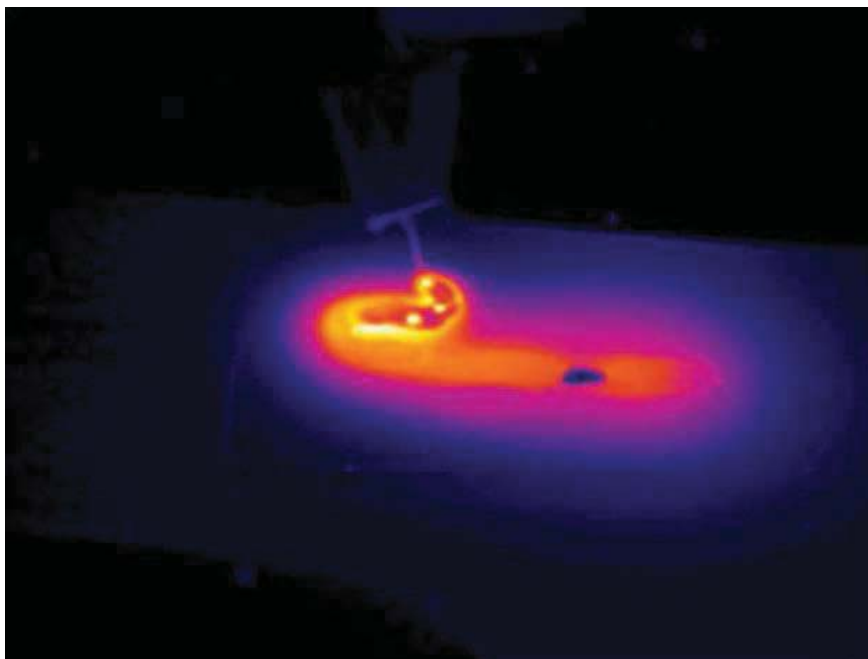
Faults in welding detected through thermal imaging.
